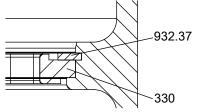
Bearing bracket fastening, motors: 70 4 215 4, 47 6 205 6 and 40 8 160 8
